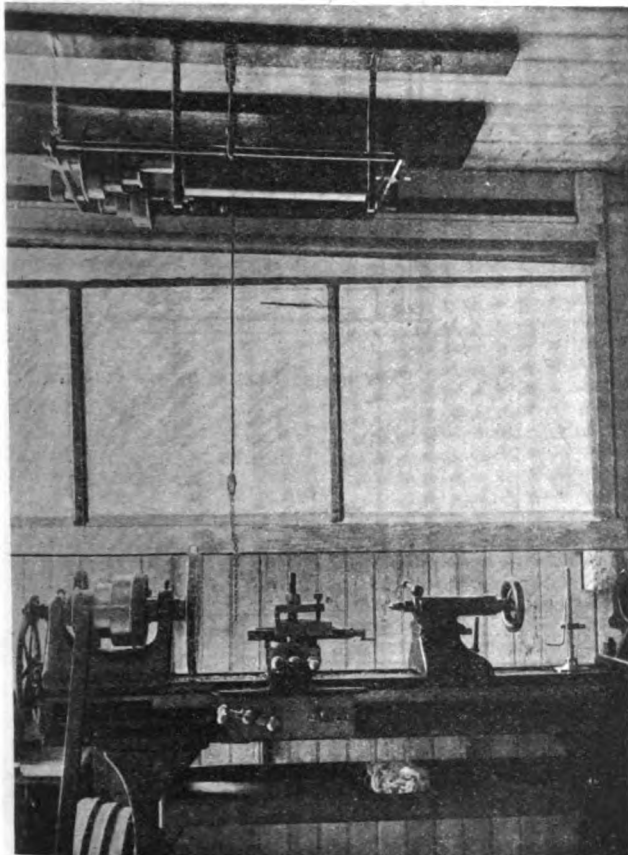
SHOWING GENERAL ARRANGEMENT OF OVERHEAD GEAR FOR A 5½-IN. SCREW-CUTTING LATHE.
